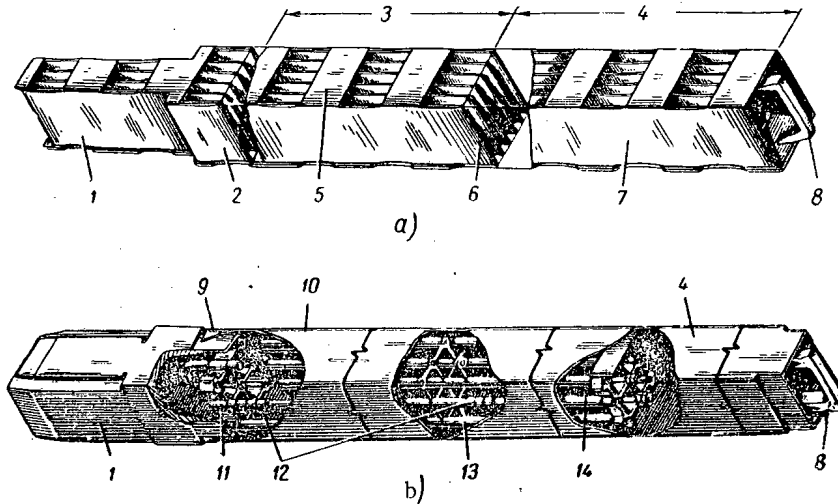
VBWR reactor fuel-element assemblies. 1) Locating tip; 2) lower steel cladding plates; 3) active section; 4) coolant exit section; 5) side steel plate; 6) laminar fuel element; 7) upper steel cladding; 8) gripping handle; 9) sliding joint; 10) Zircalloy shell; 11) Zircalloy plug; 12) fuel pellets; 13) Zircalloy tubing for fuel element; 14) fuel tube expansion spring.
